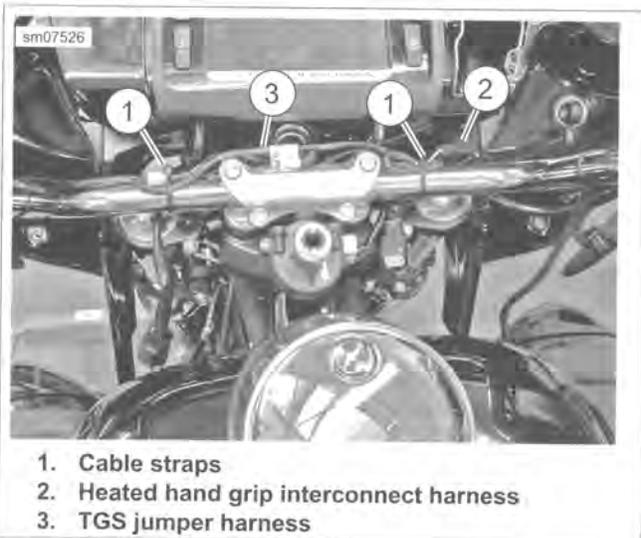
Attach Chaser Wire to Twist Grip Sensor Jumper Harness
